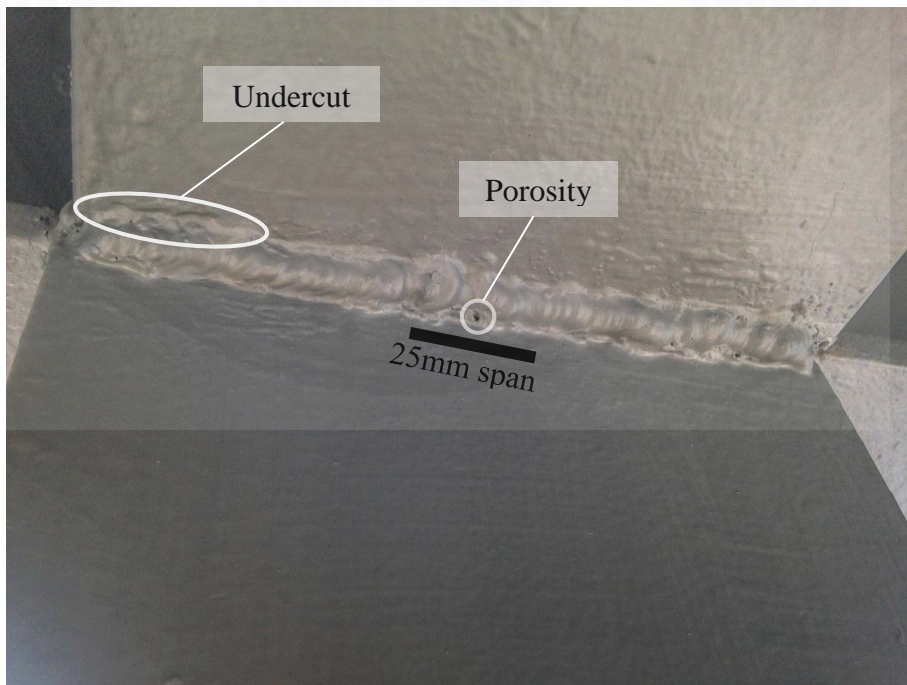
Welding defects on Steel Structure A (joint 6)
